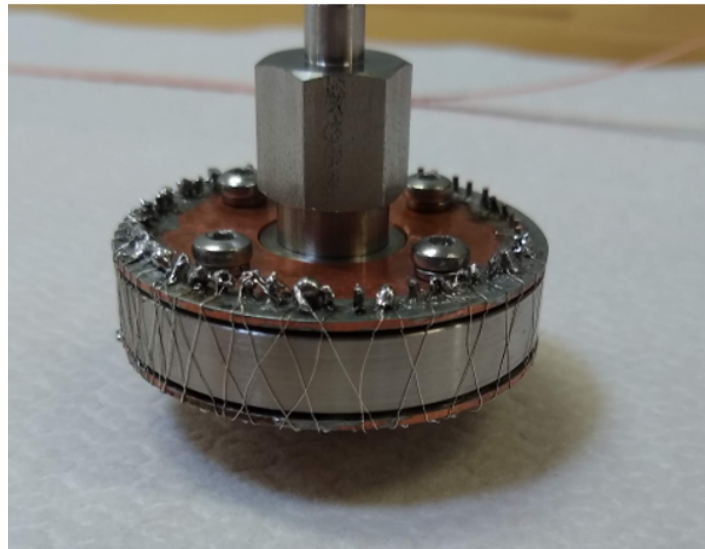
Picture of the dot-like contact array roller. Thin silver coated copper wires are soldered on copper pins which are fixed on copper discs. The ‘criss-cross’ configuration, shown here, turned out to be the most favorable.
